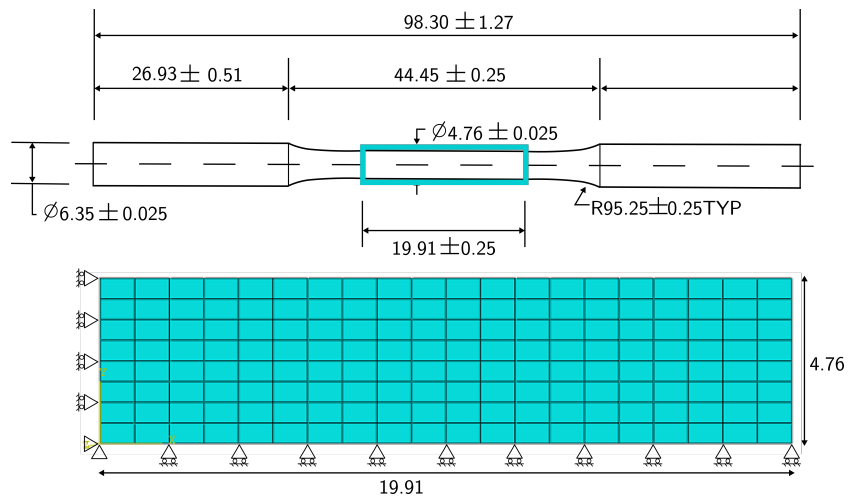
Reverse yield test specimen (all dimensions in mm) [4]
